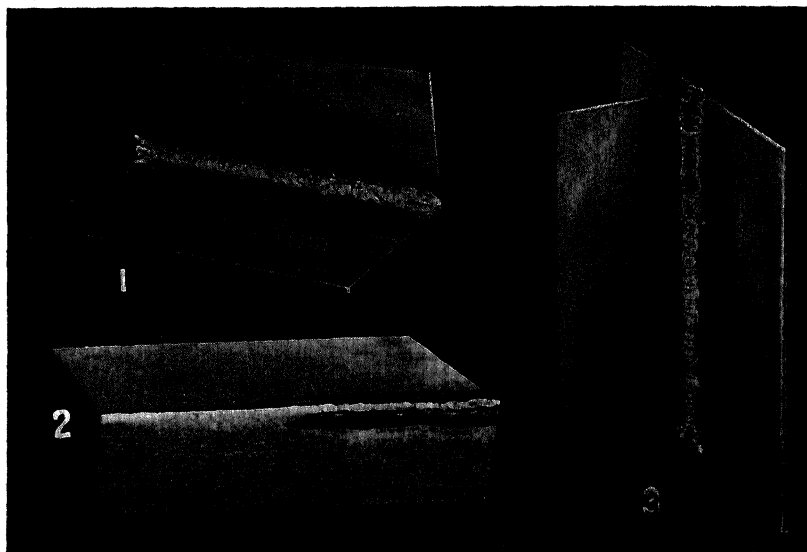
Welds in 14 gauge stainless steel. (1) Fillet weld, downhand position. (2) Corner weld, portion ground off to show resemblance to parent metal. (3) Fillet weld, vertical position.
